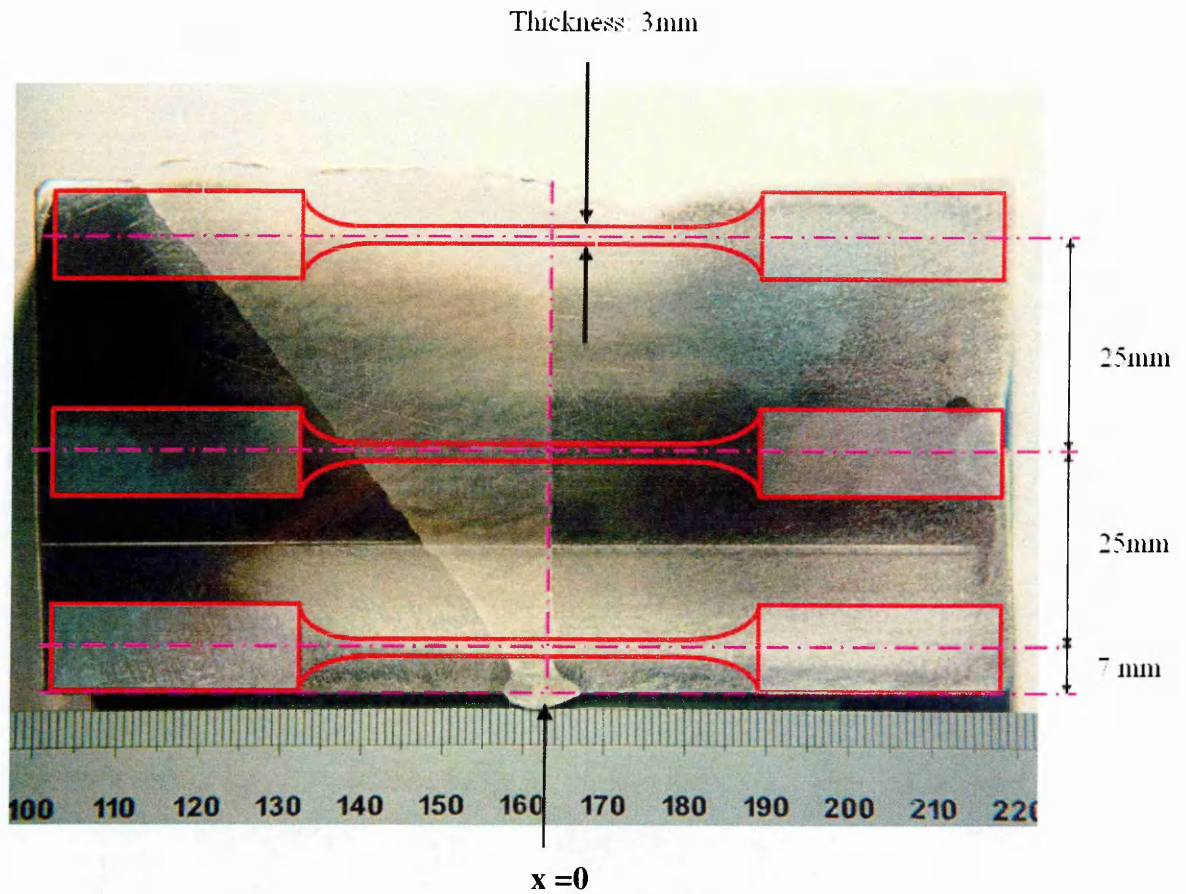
Thick section test weldment made from ex-Heysam I service material and showing test specimen extraction locations
